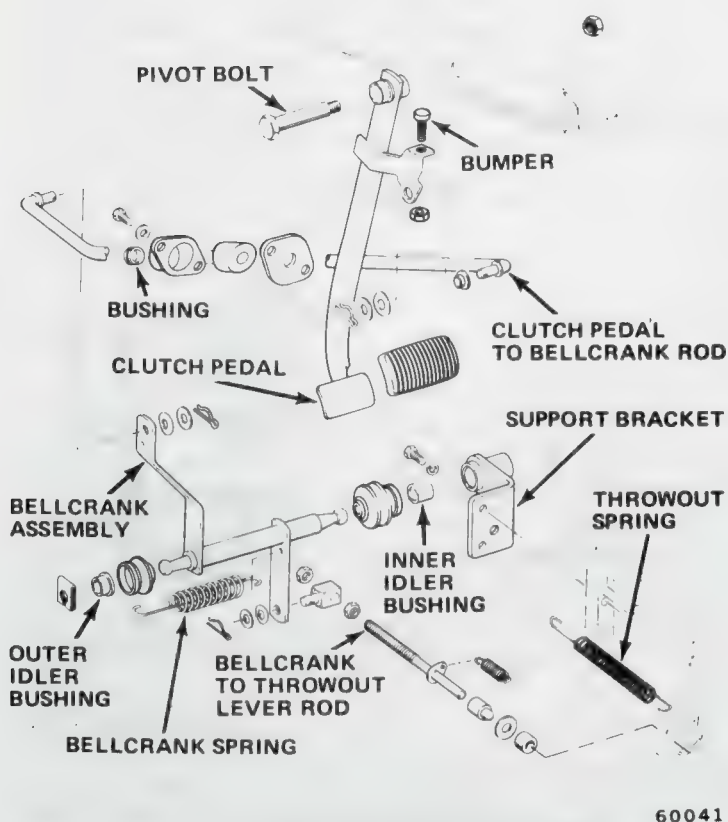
A-10 Clutch Pedal and Linkage—Six-Cylinder Engine
